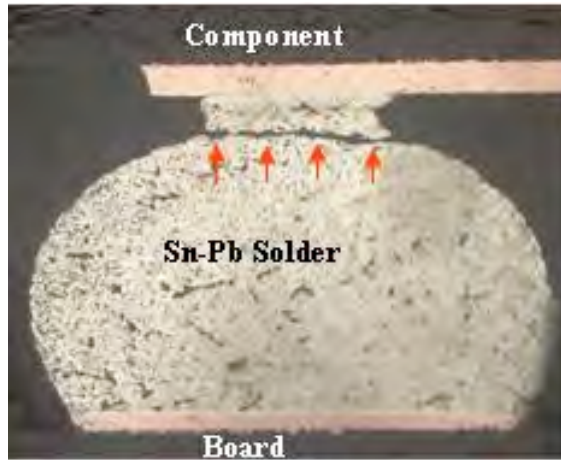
Cross-sectioning image of the outer most solder joint shows failure in the solder neck [73]
